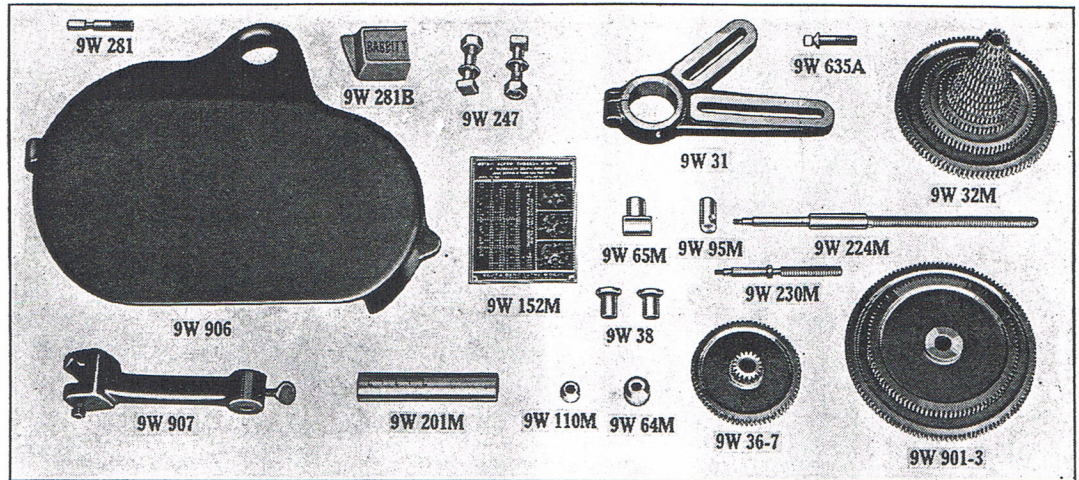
Metric Parts for 9-inch "Workshop" South Bend Lathes—Models A, B, and C.
